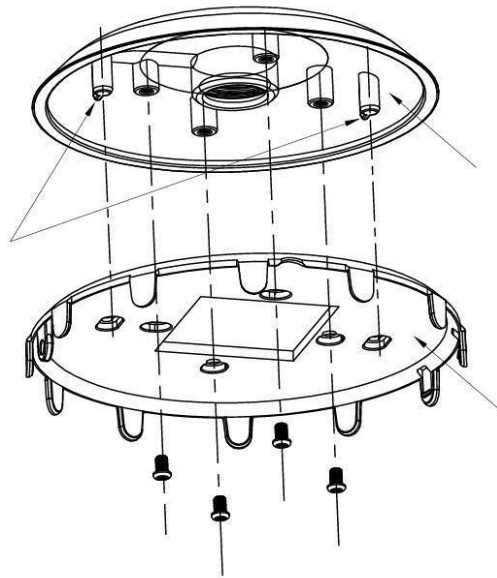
Pendant mount, step 1: preparing the bracket assembly.
